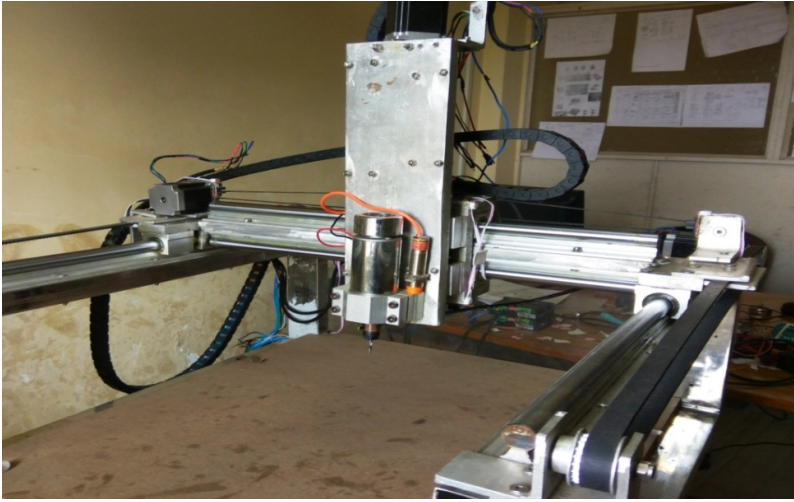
Working model of the proposed CNC Milling-cum-3D printing work-station
